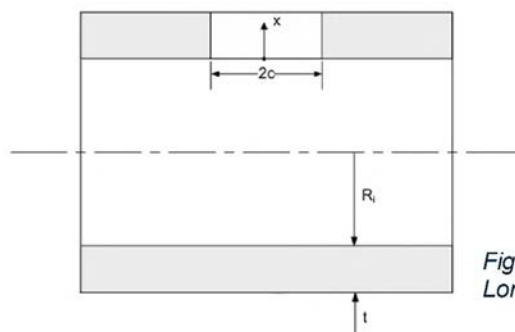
Cylinder – Through-wall Crack, Longitudinal Direction, API-579
